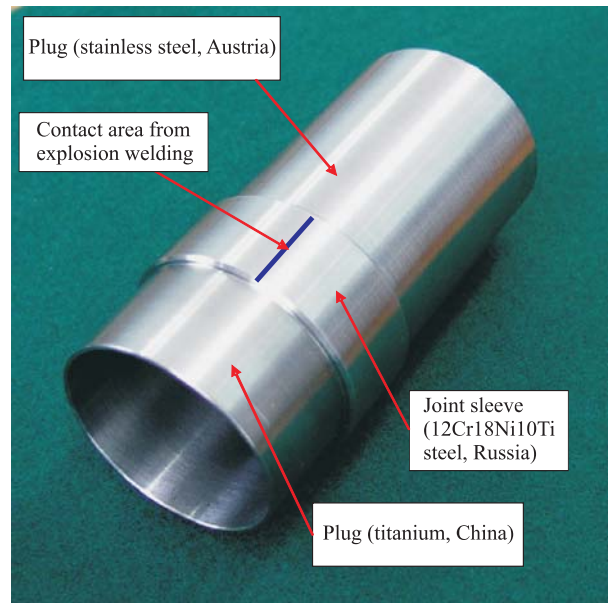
General view of the bimetallic tube billet with the joint sleeve
